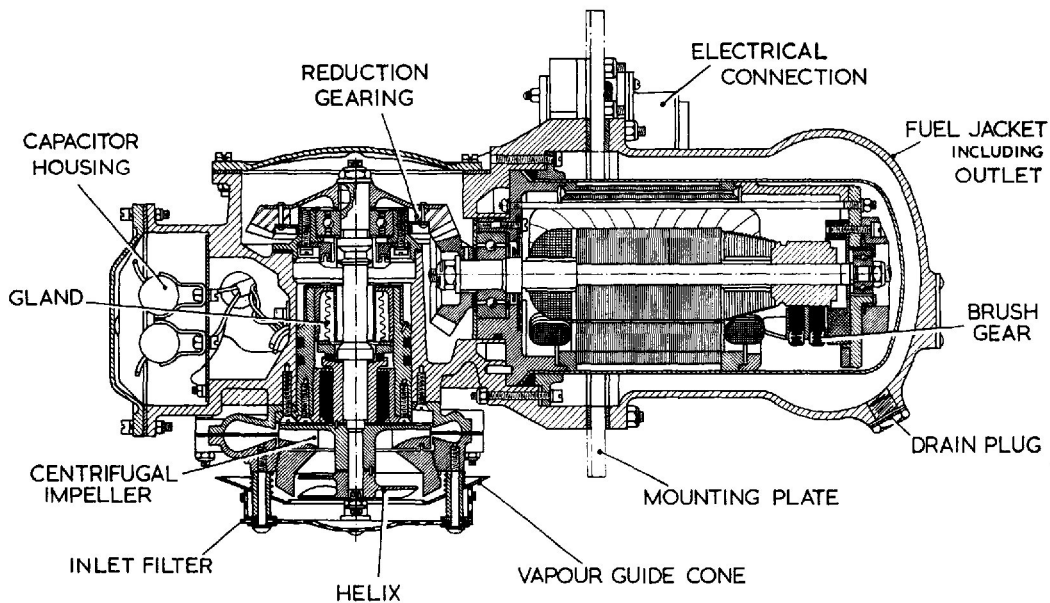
Sectional view of SPE.1201 Mk. 3 fuel pump
